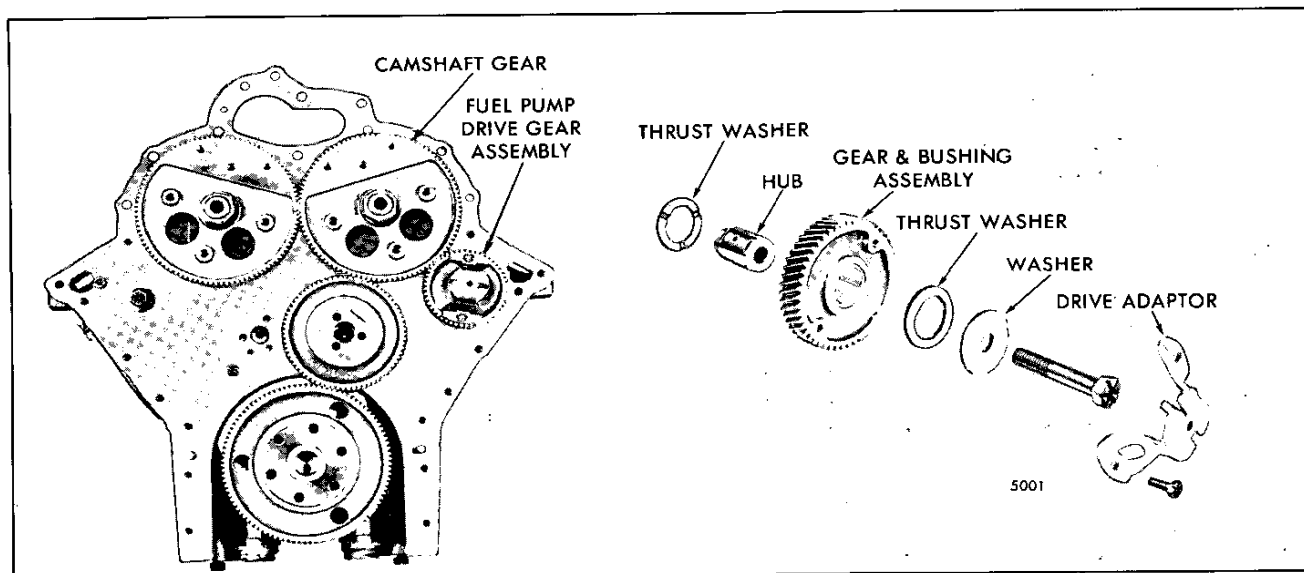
Typical Fuel Pump Drive Gear Mounting and Details (V-Type Engine)
